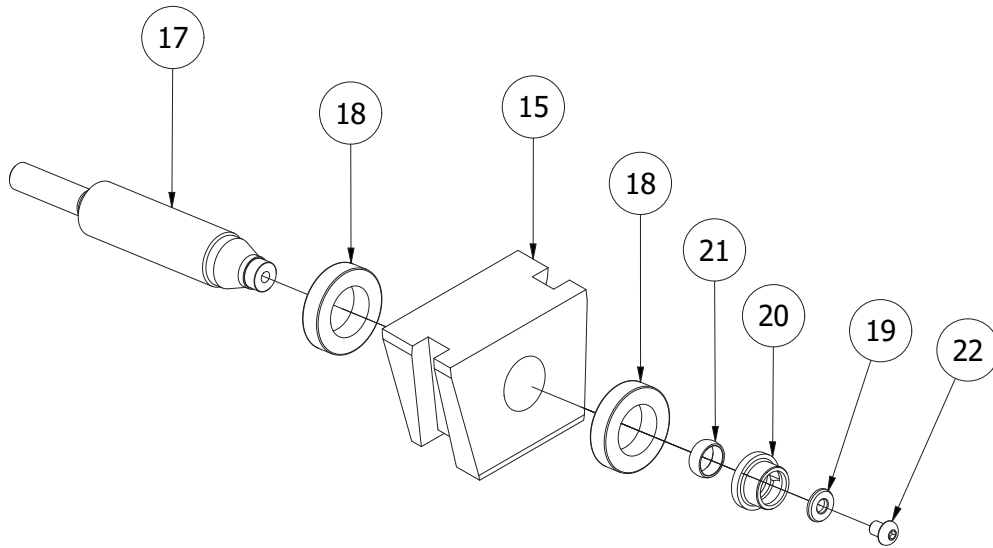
AGSE-E22102-S05 RH Spindle Assembly (Adjustable)
